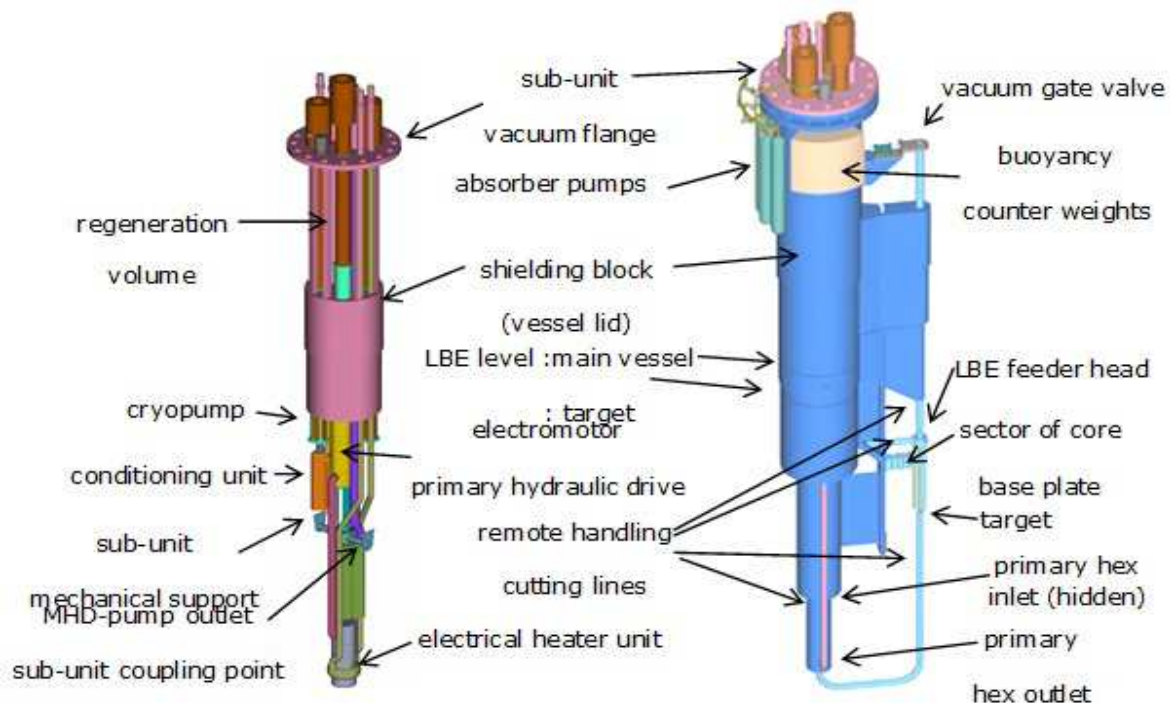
Spallation subunit and outside housing of the spallation loop (2005 concept).
